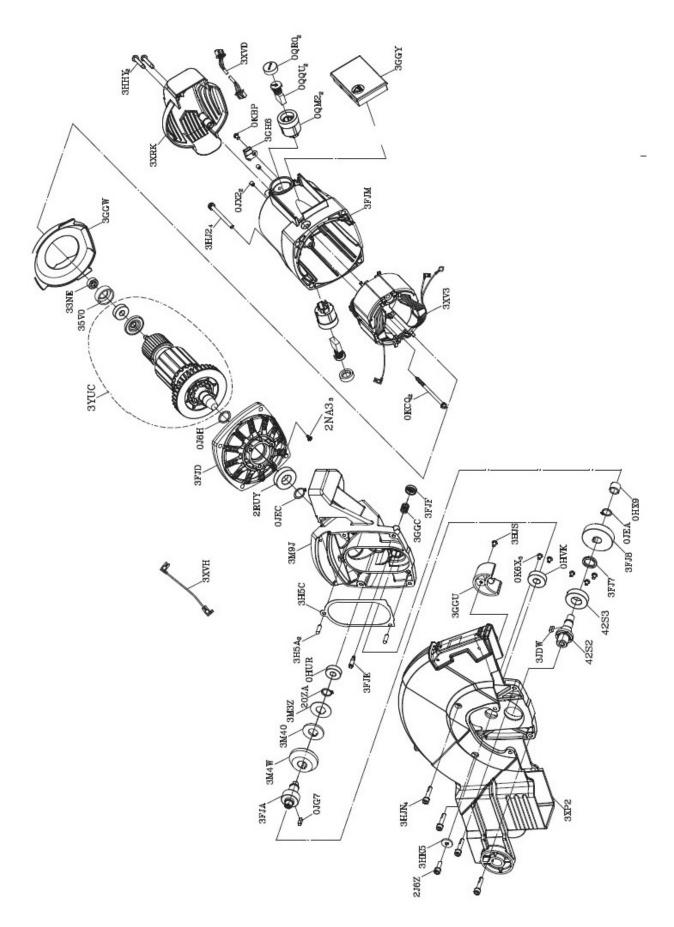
Spare parts drawing 2 KGZ 3050 VARIO
